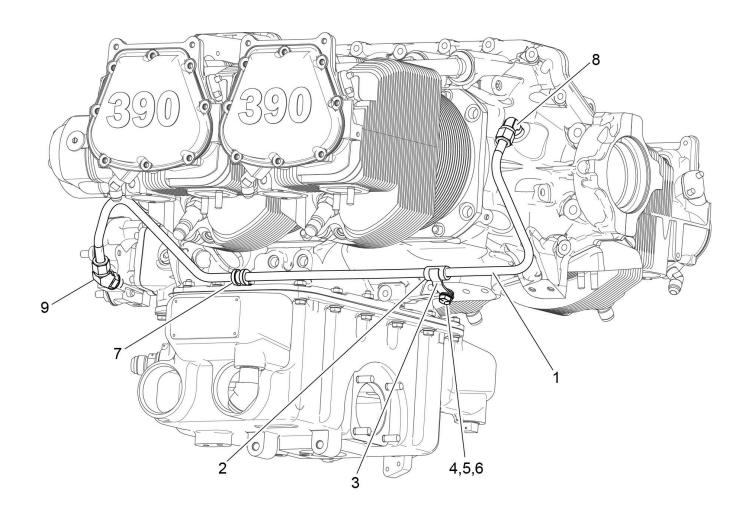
Propeller Governor Oil Line Tube Assembly and Attaching Parts
